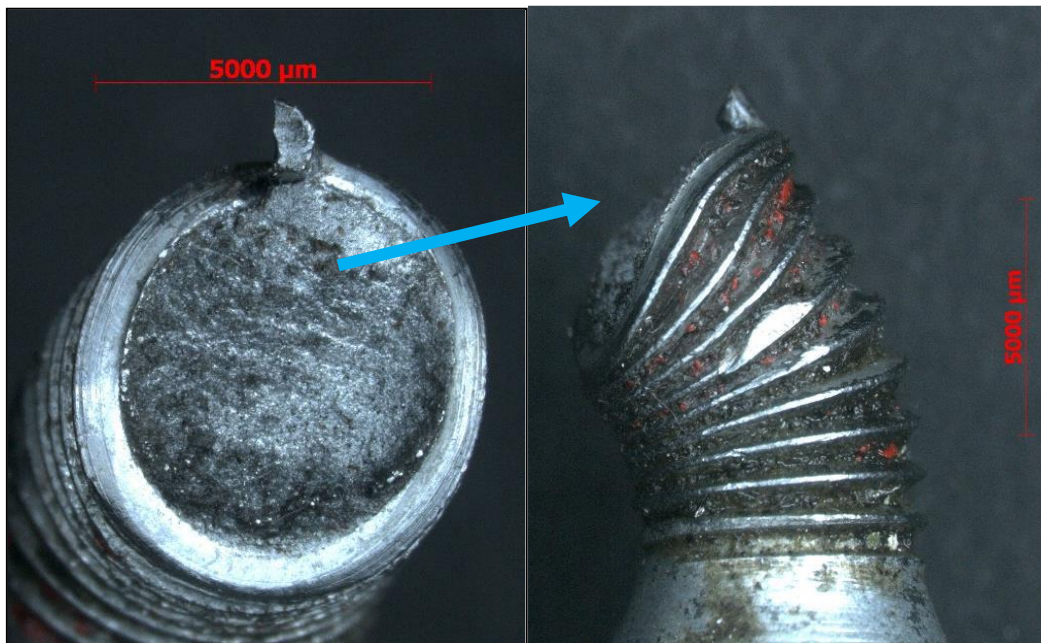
Fracture surface morphology and side view of the threaded section of the failed upper-eye rod end observed under the Stereomicroscope. (Source: University of Pretoria Failure Analysis Report)
